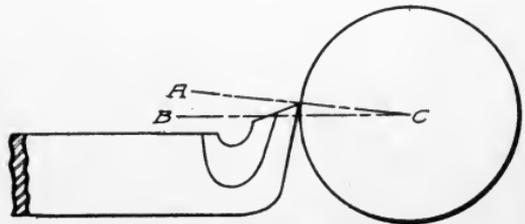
Standard Setting with Cutting Edge of Tool a Little Above Center
